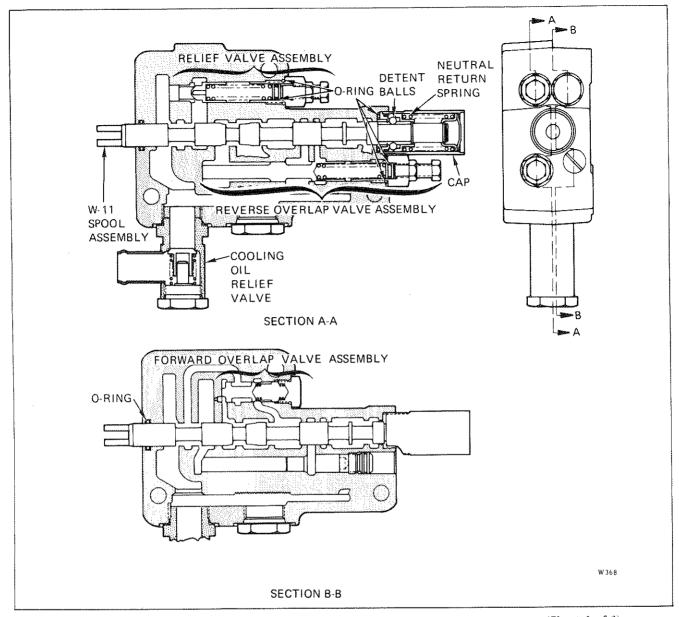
CONTROL VALVE REMOVAL, POWER CONTROLLED WINCH (Sheet 2 of 2)
